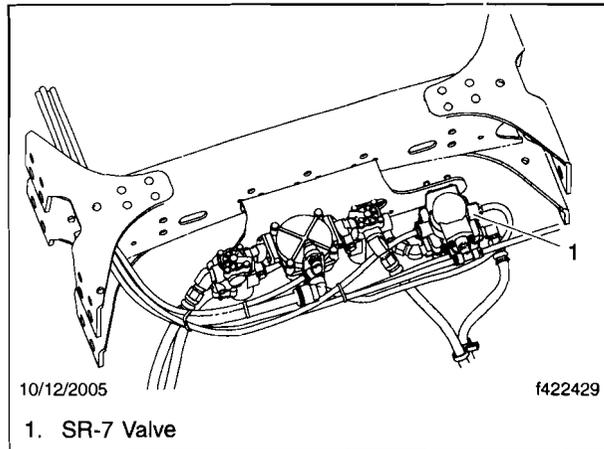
, SR-7 Spring Brake Modulating Valve Installation (typical)
